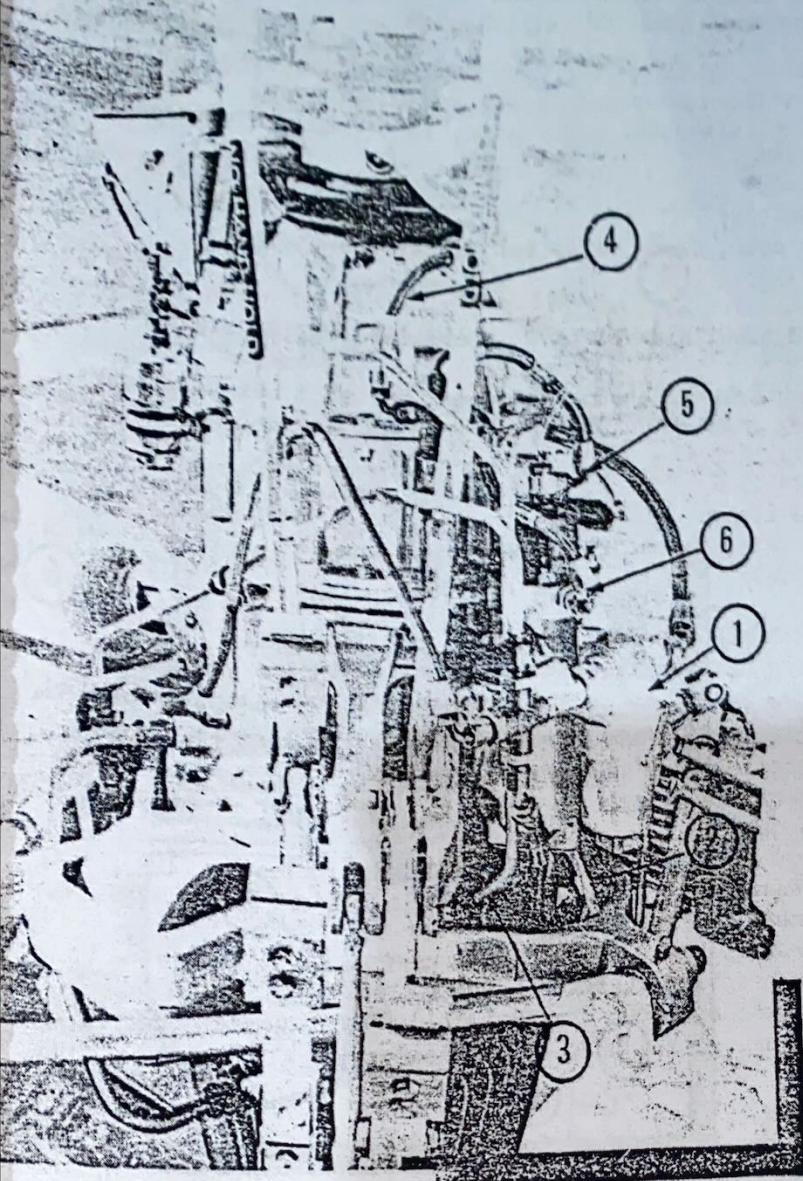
Transmission and Lower Gearcase Lubrication System, Right View.
